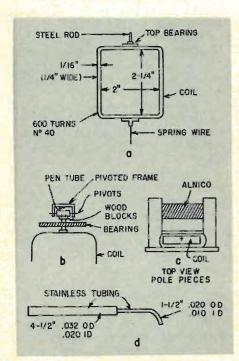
a—The pen motor coil. b—How the pen is mounted. c—Top view of the magnetic assembly. d—Recorder pen detail.
